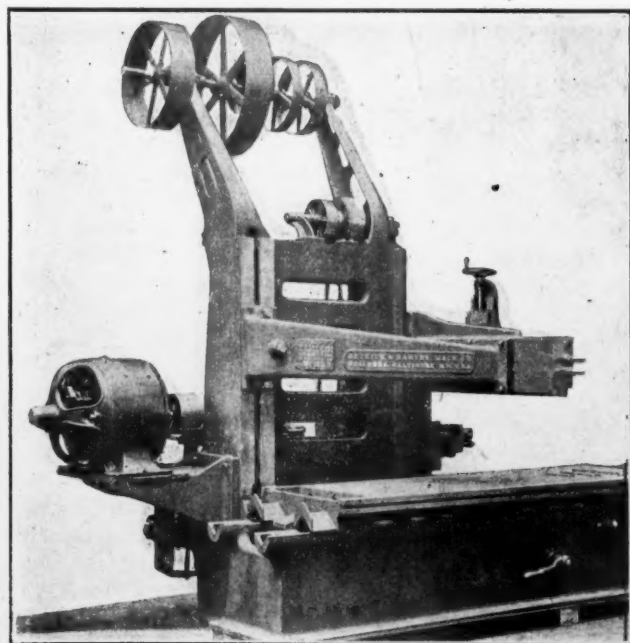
THE TYPE OF INDIVIDUAL DRIVE (BELTED) USED UPON THE SMALLER SIZES OF OPEN-SIDE PLANERS BY THE DETRICK & HARVEY MACHINE COMPANY.—GENERAL ELECTRIC MOTOR.
